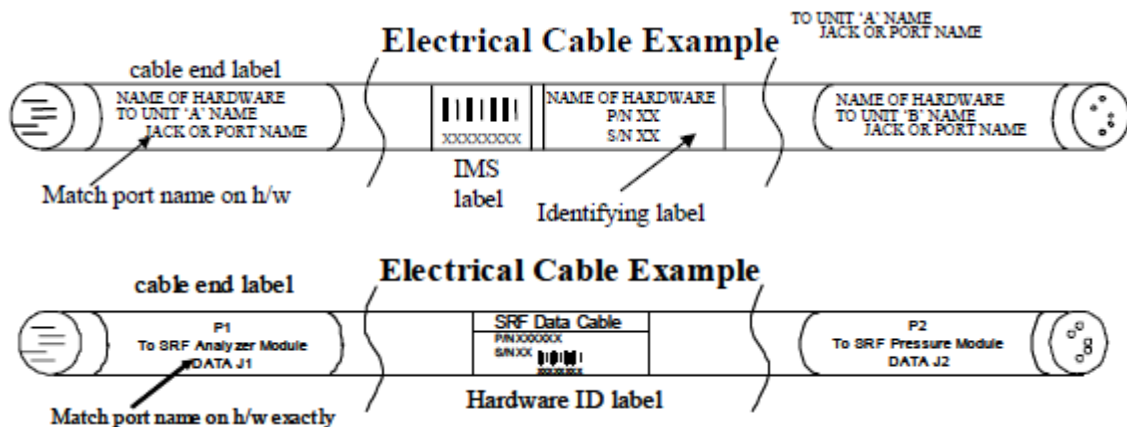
SAMPLE ISS ELECTRICAL CABLE LABELING
